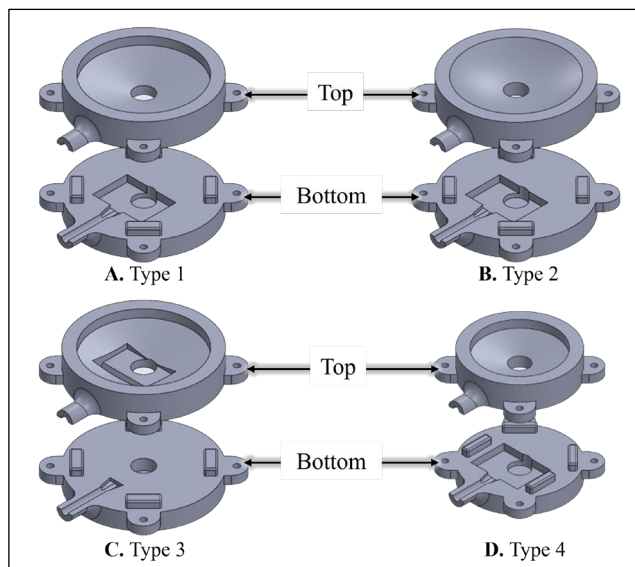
CAD parts of four stethoscopes with different design parameters.
